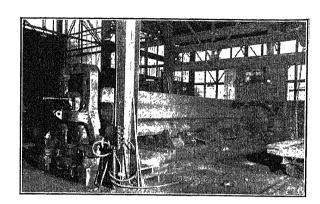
36-Ft. Bending Rolls Forming 30-Ft. Half Section of 48-In. Pipe
